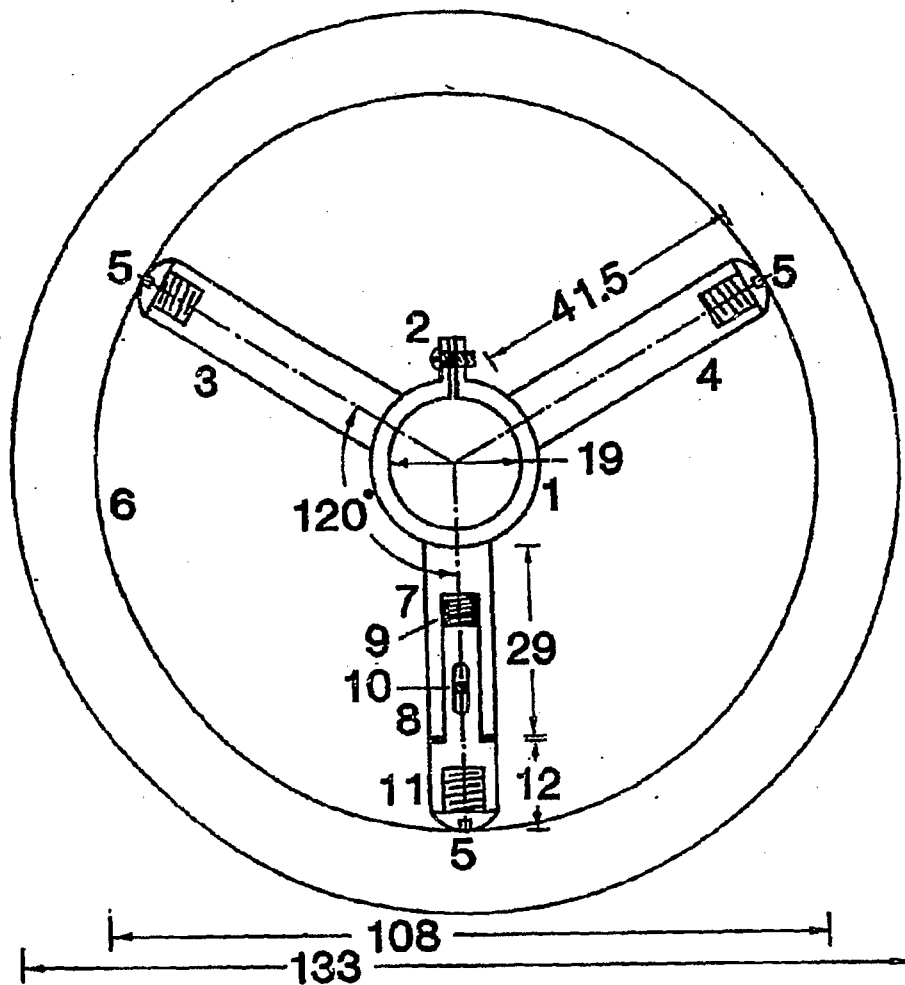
A three - arm locating clamp for the heat transfer probe in the bubble column. All dimensions are in mm. (1) ring clamp, (2) screw, (3, 4) radial arms, (5) Teflon rounded cap, (6) column surface, (7) telescopic arm, (8) telescopic arrangement, (9) spring, (10) locking pin, and (11) front end of the telescopic arm.
